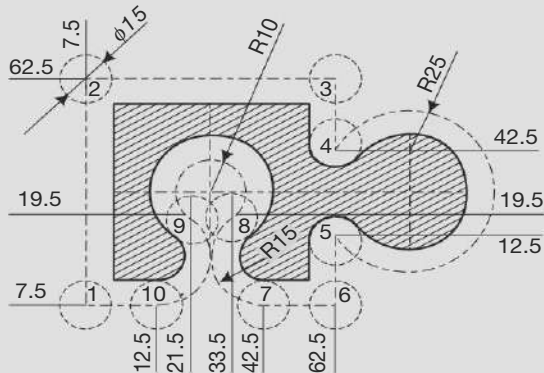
Part drawing shown with cutter for Example 13.13
